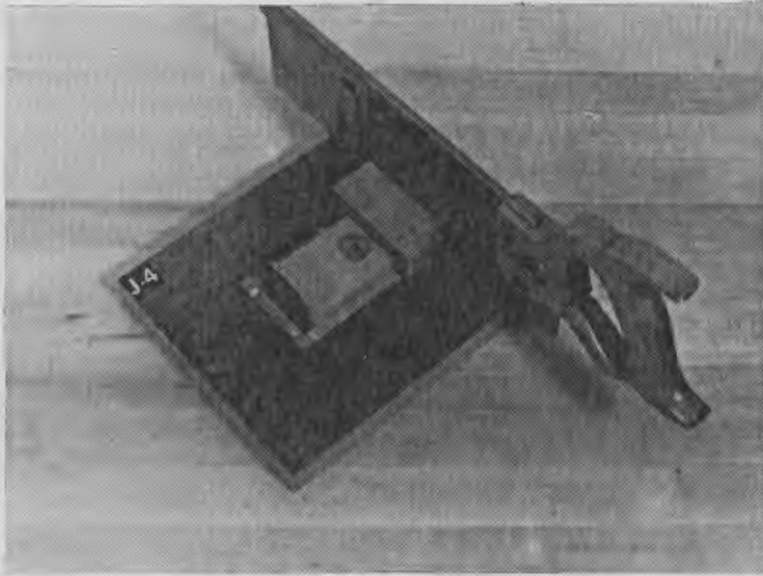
Figure VII. This jig was used with a backsaw, to cut the descriptive saw kerfs in one end of each peg.
